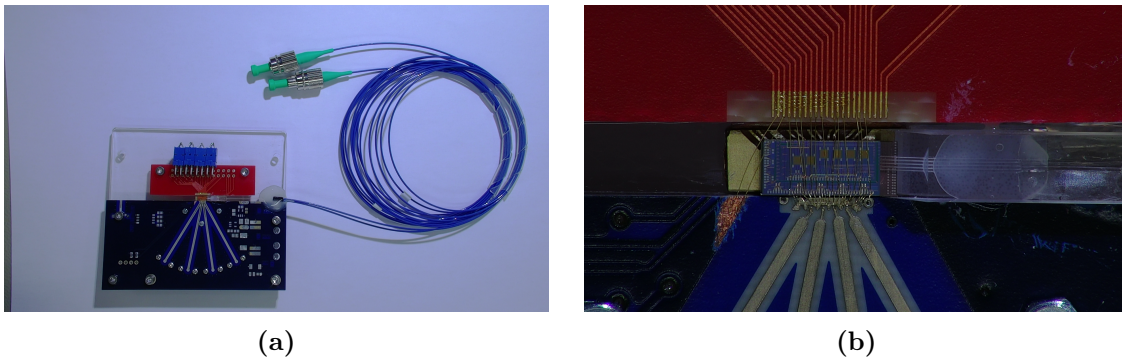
(a) A picture of the initial WDM test board. (b) A zoomed in picture of the initial WDM test board showing the Si PIC, the two PCB parts with the electrical traces that are wire bonded to the PIC electrical contacts, as well as the fiber array that is attached on top of the PIC.
